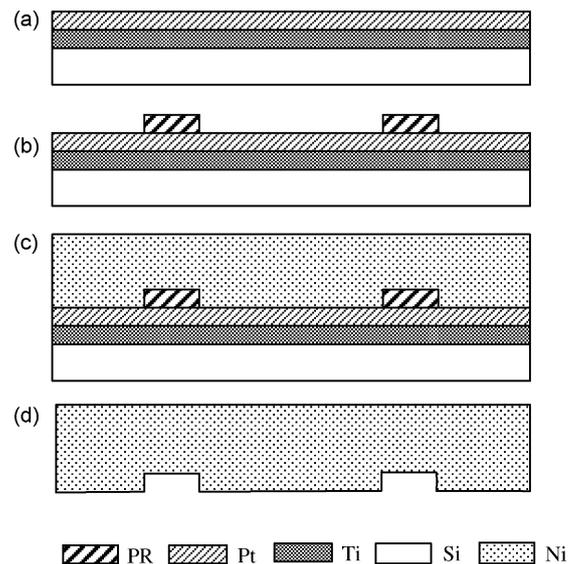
Process flow for fabricating the gear mold insert: (a) use PECVD to sputter a 200 Å bonding layer Ti and 1000 Å conducting layer Pt; (b) pattern a 500 μm SU8 gear by photolithography; (c) deposit Ni on the SU8 gear by electroforming; and, (d) separate the Ni layer and apply post processes to obtain the Ni gear mold insert.
